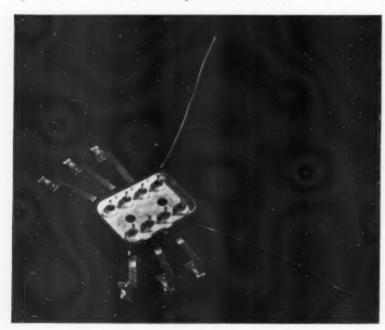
A sprung plug body in the assembly of which brass is welded to two nickel-silver springs each 0.018 in. thick, by a common weld.
